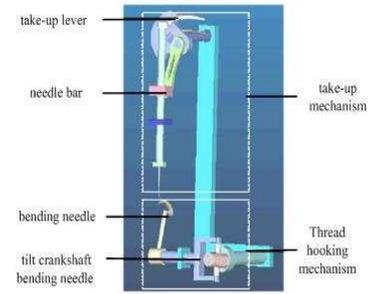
The diagram of take-up mechanism and thread hooking mechanism of sewing machine
